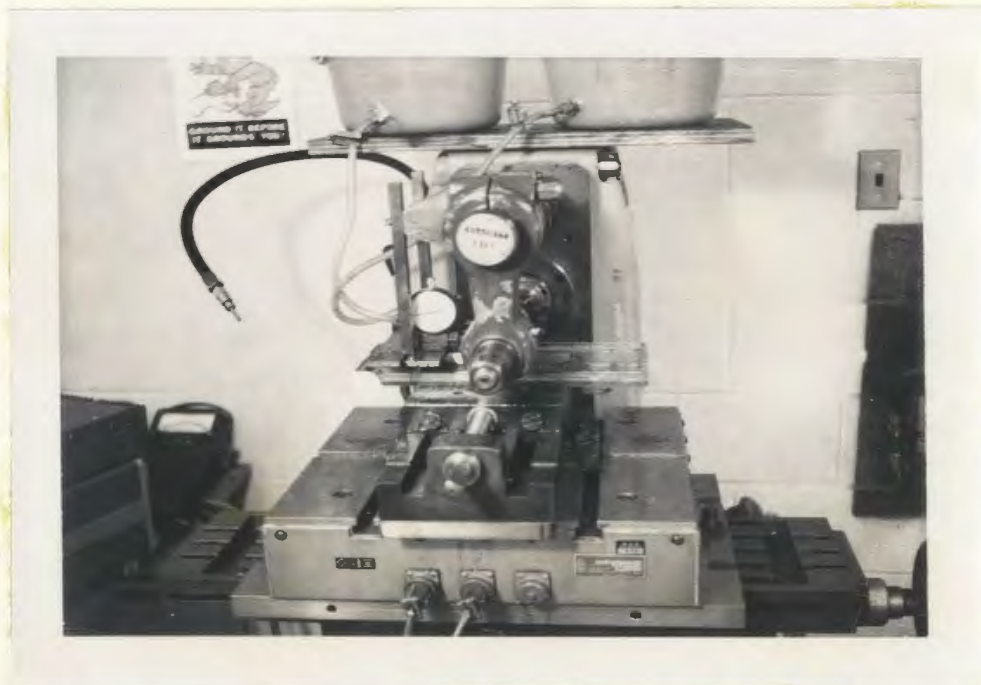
DIAL GAUGE AND MOUNTING BRACKET
